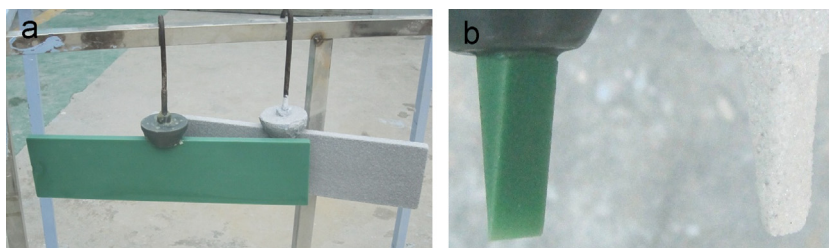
Photographs of the patterns and dipped molds: (a) MOR plates and (b) wedge pieces.
